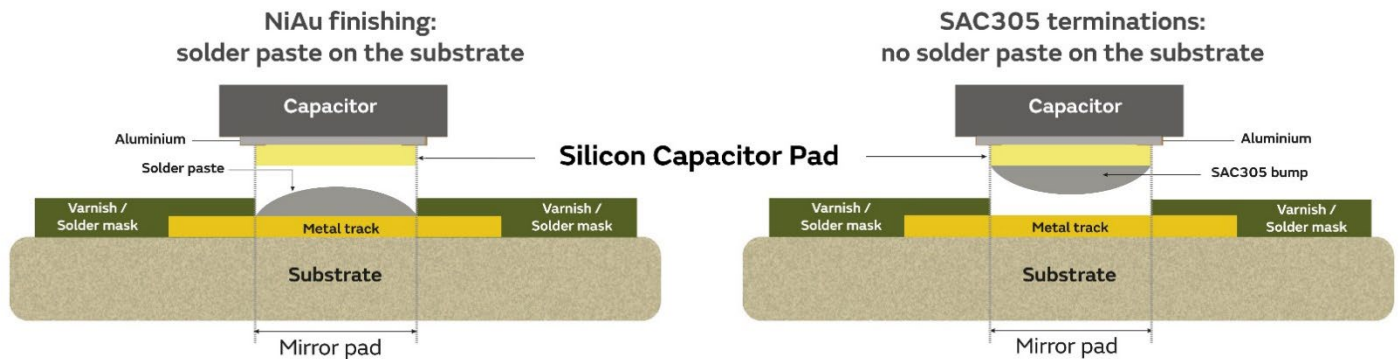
Simplified view of SMD assembly from the side (only one pad is shown here)
